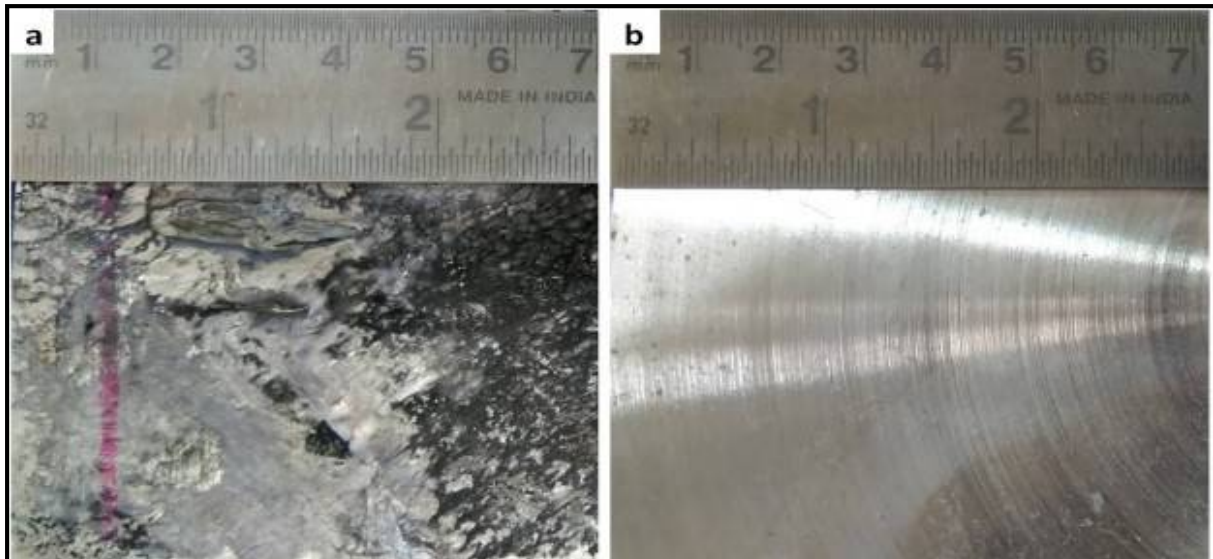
Surface of AS21A alloy casting plate (a) as received; (b) machined
